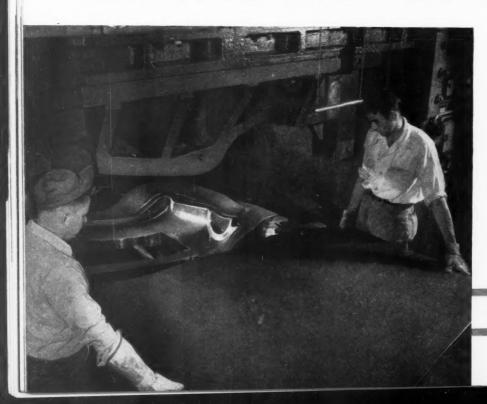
Hoods are drawn from flat steel blanks 64 3/4 inches wide by 72 inches long on the 750-ton press illustrated
